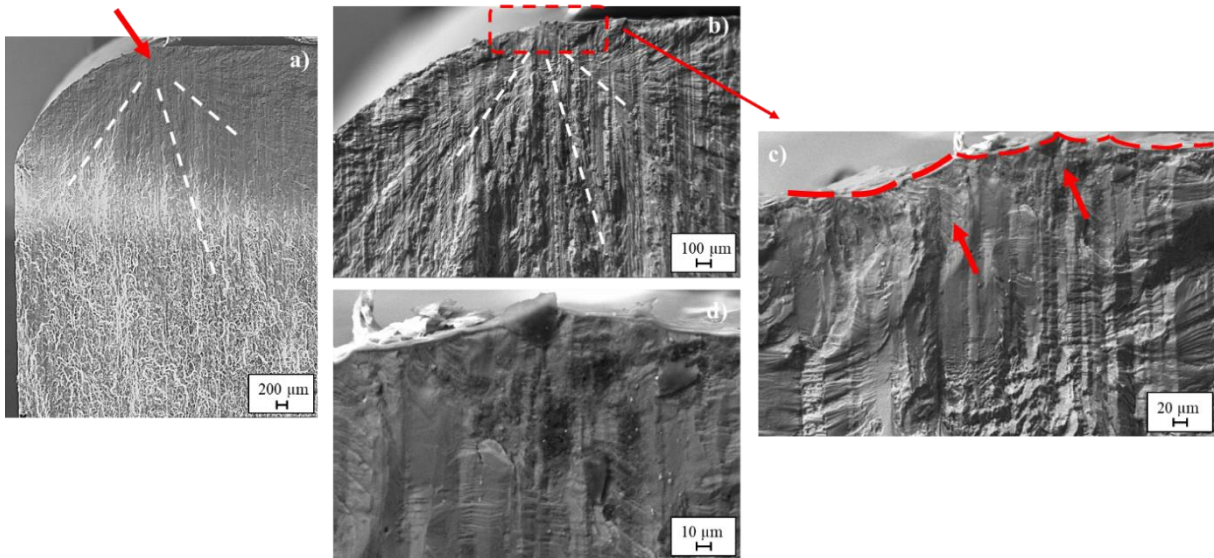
Fracture surface of As M.+SP+TSA component at different magnifications: a) overall view of the fracture surface; b-c) location of the crack nucleation site; d) magnification of the boundary region between two indentation footprints.
